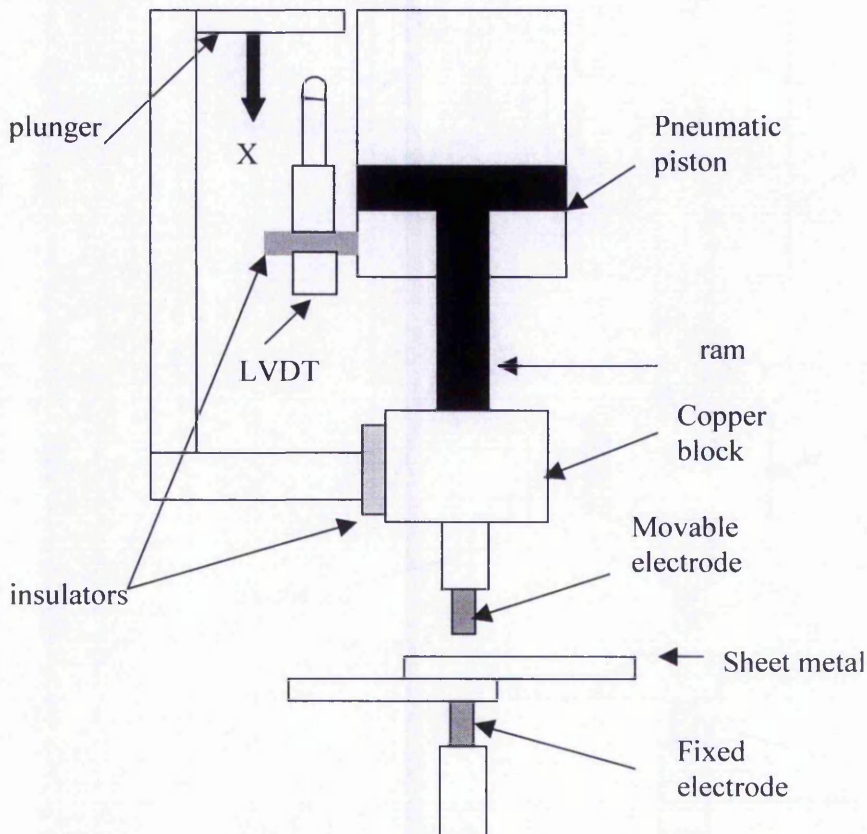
Schematic diagram of the LVDT attachment to the spot welding machine
